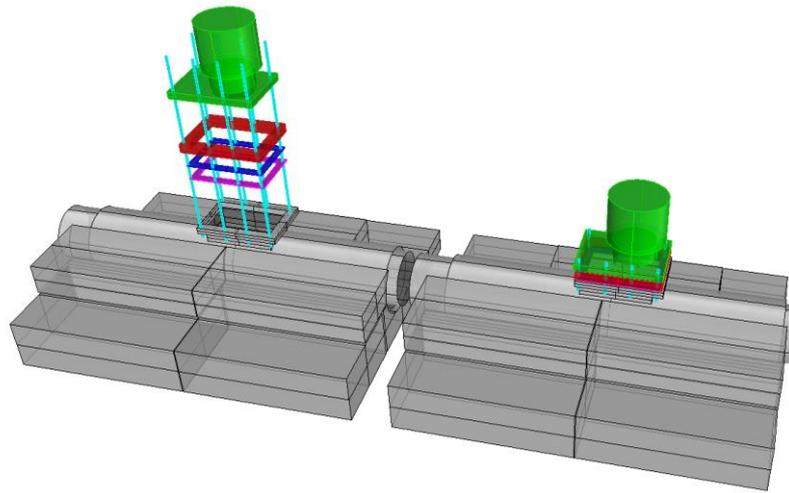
Option to assemble bow thruster unit in bow thruster tube
